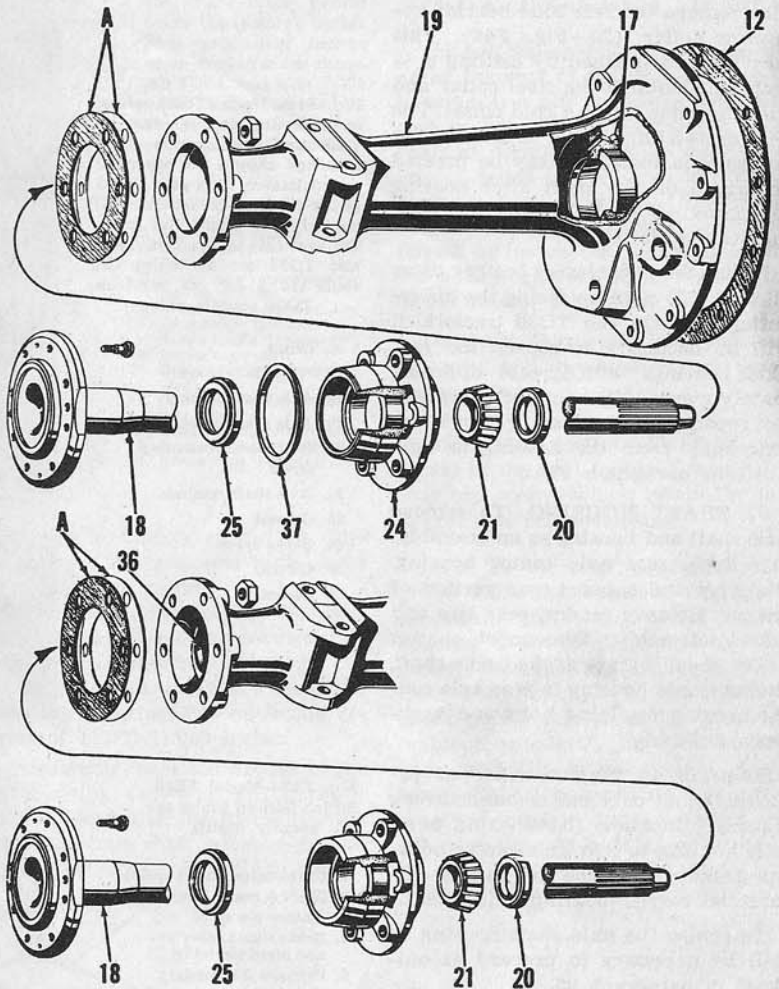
Wheel axle shaft housing and related parts. Top view—TO20 unit. Oil seal (25) is used on TE20 and TO20 models only. TE20 is similar. Bottom view—TO30 unit. Oil seals (25 & 36) are used on TO30 models only.
